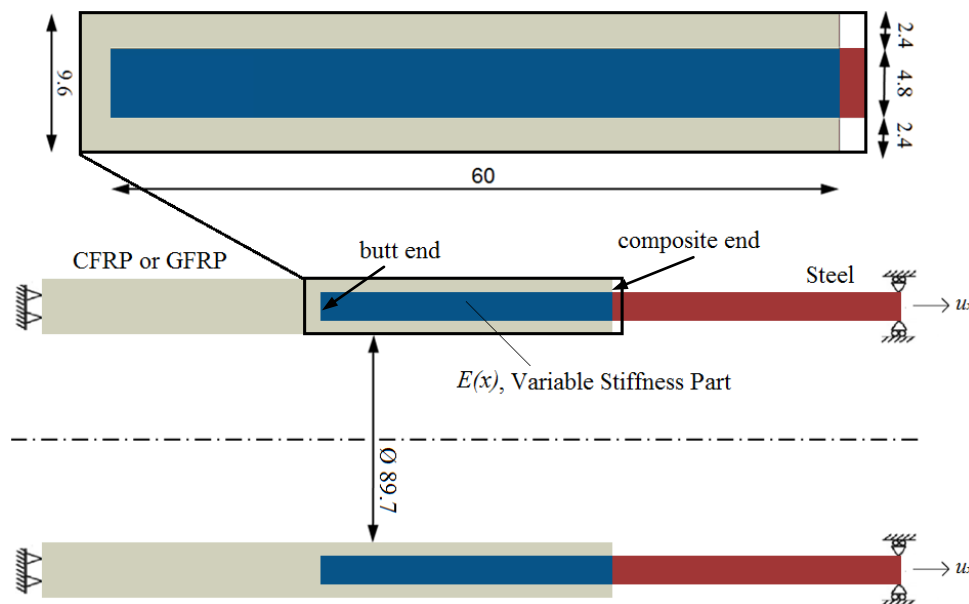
Axisymmetric tubular joint geometry (dimensions in mm), loading and boundary conditions.
